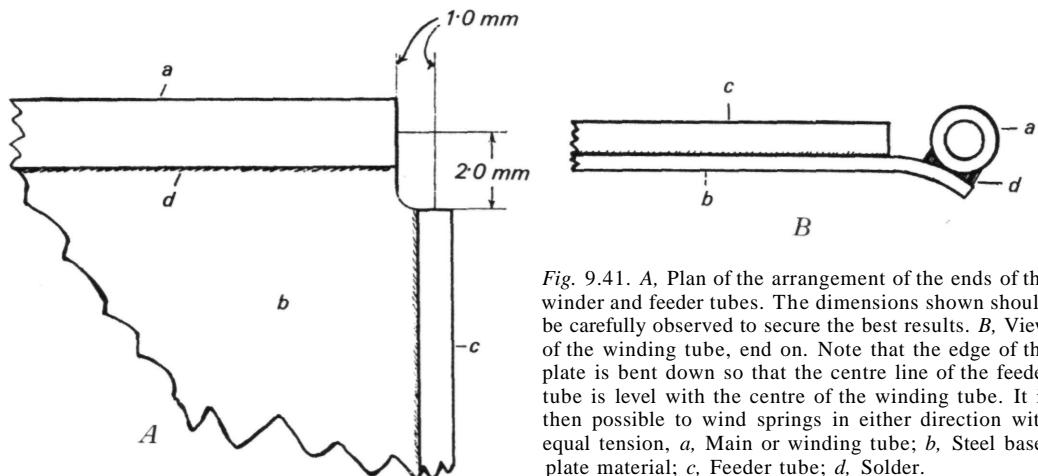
A, Plan of the arrangement of the ends of the winder and feeder tubes. The dimensions shown should be carefully observed to secure the best results. B, View of the winding tube, end on. Note that the edge of the plate is bent down so that the centre line of the feeder tube is level with the centre of the winding tube. It is then possible to wind springs in either direction with equal tension, *a*, Main or winding tube; *b*, Steel base-plate material; *c*, Feeder tube; *d*, Solder.
